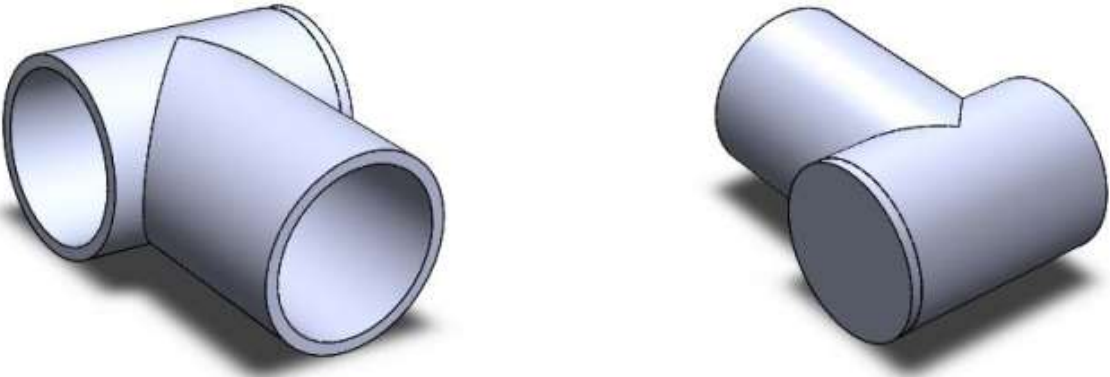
Design of RGM housing for investigated ball valve with nominal diameter of 100 mm
